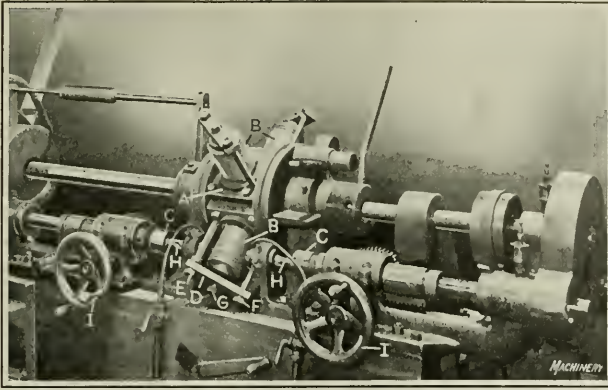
Hoefler Special Opposed-spindle Duplex Drilling Machine for simultaneously drilling the Wrist-pin Bearing Holes in Piston Castings
